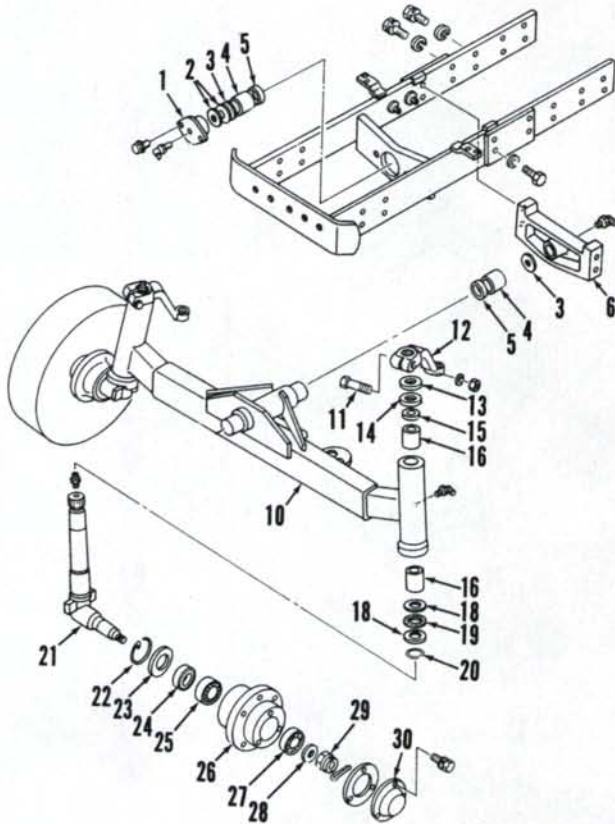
Exploded view of fixed tread width front axle assembly used on Model 1320.
